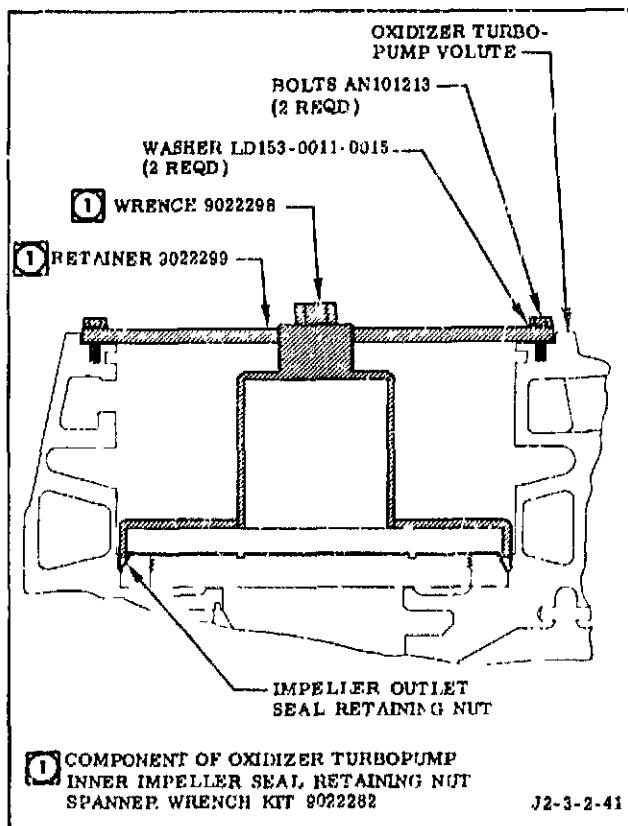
GSE Setup for Impeller Outlet Seal Retaining Nut
